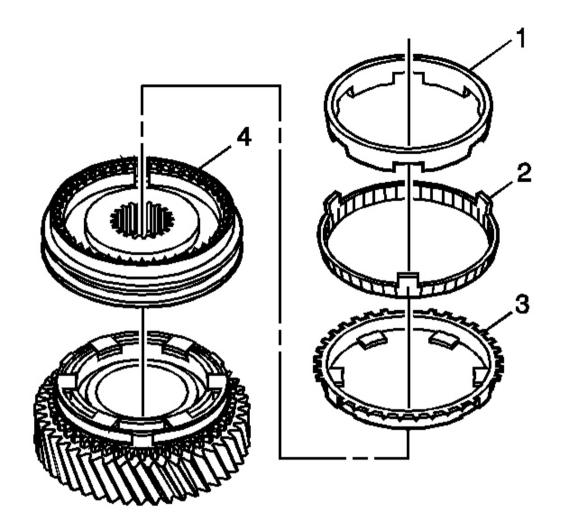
Exploded View Of 1st Gear Assembly Courtesy of GENERAL MOTORS CORP.
